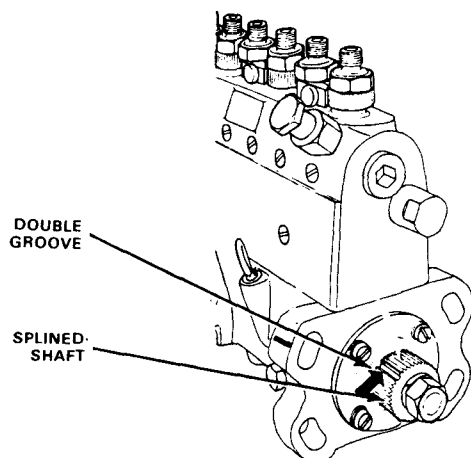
Removing Injection Pump From Engine (SSD-655)
